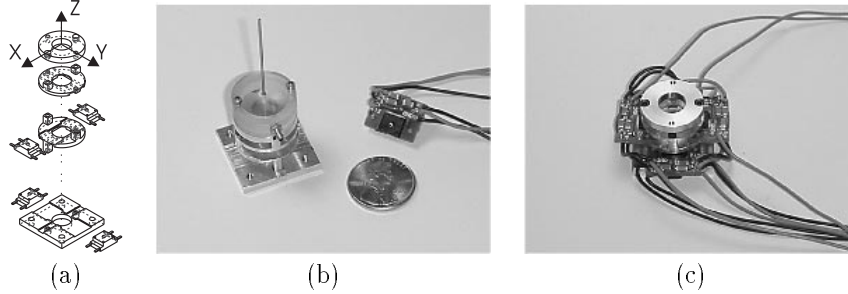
3-Axis force sensor: (a) exploded assembly drawing of the flexure and single-axis load cells, (b) photograph of the flexure with clear LexanTM vacuum chamber and one load cell, (c) flexure with four load cells in place.
